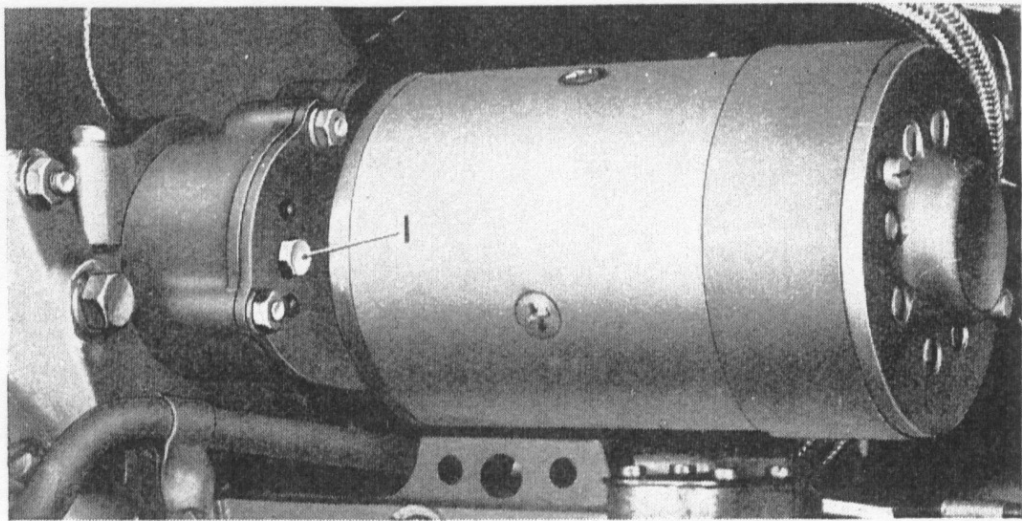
STARTER MOTOR—UNDERNEATH VIEW.
